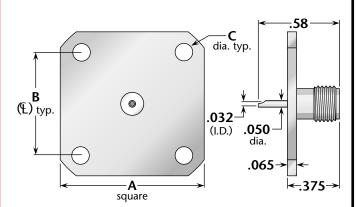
(1" square flange, interchangeable with type N standard flange size)
